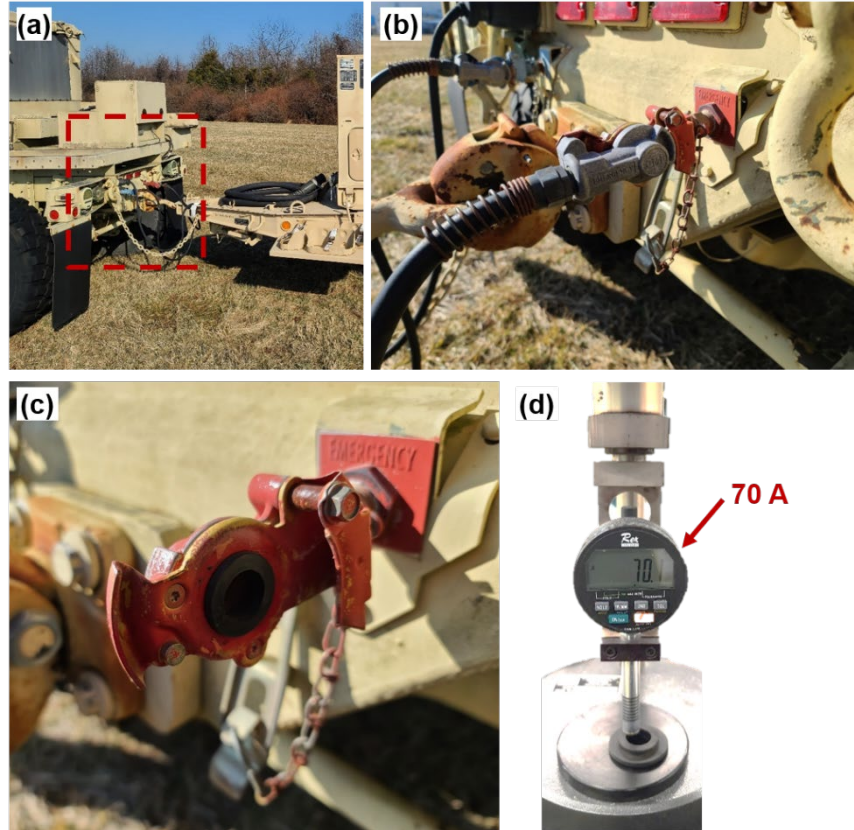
Location of gladhand seal and OEM part removal. (a) location of the gladhand seal on the emergency brake pneumatic line for connecting a trailer, (b) emergency service gladhand, (c) OEM gladhand seal, and (d) determination of urethane Shore hardness.
